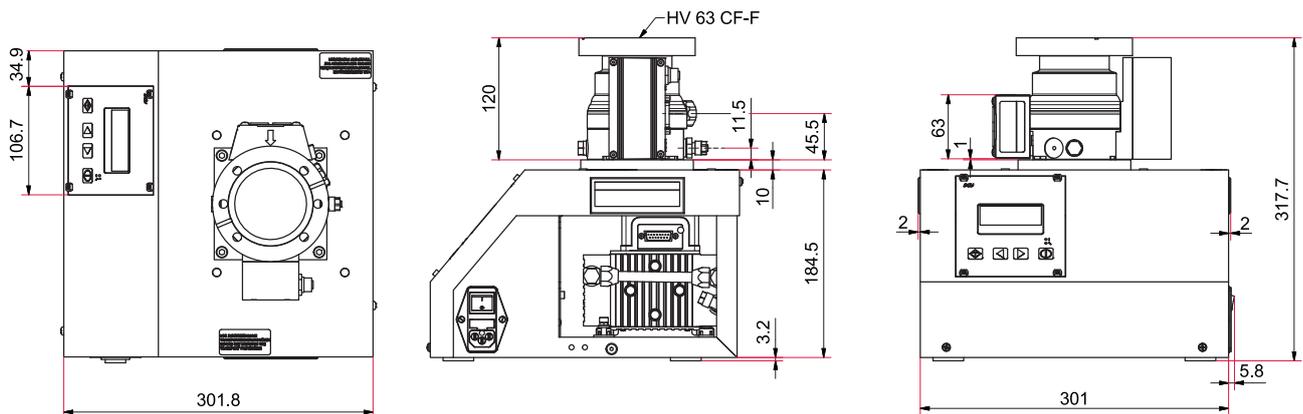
Dimensions of HiCube 30 Eco, DN 63 CF-F
